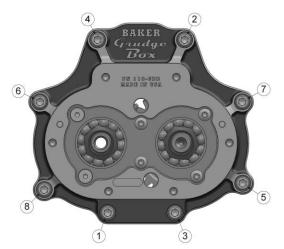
| TORQUE SEQUENCE FOR GRUDGEBOX BEARING DOOR BOLTS
